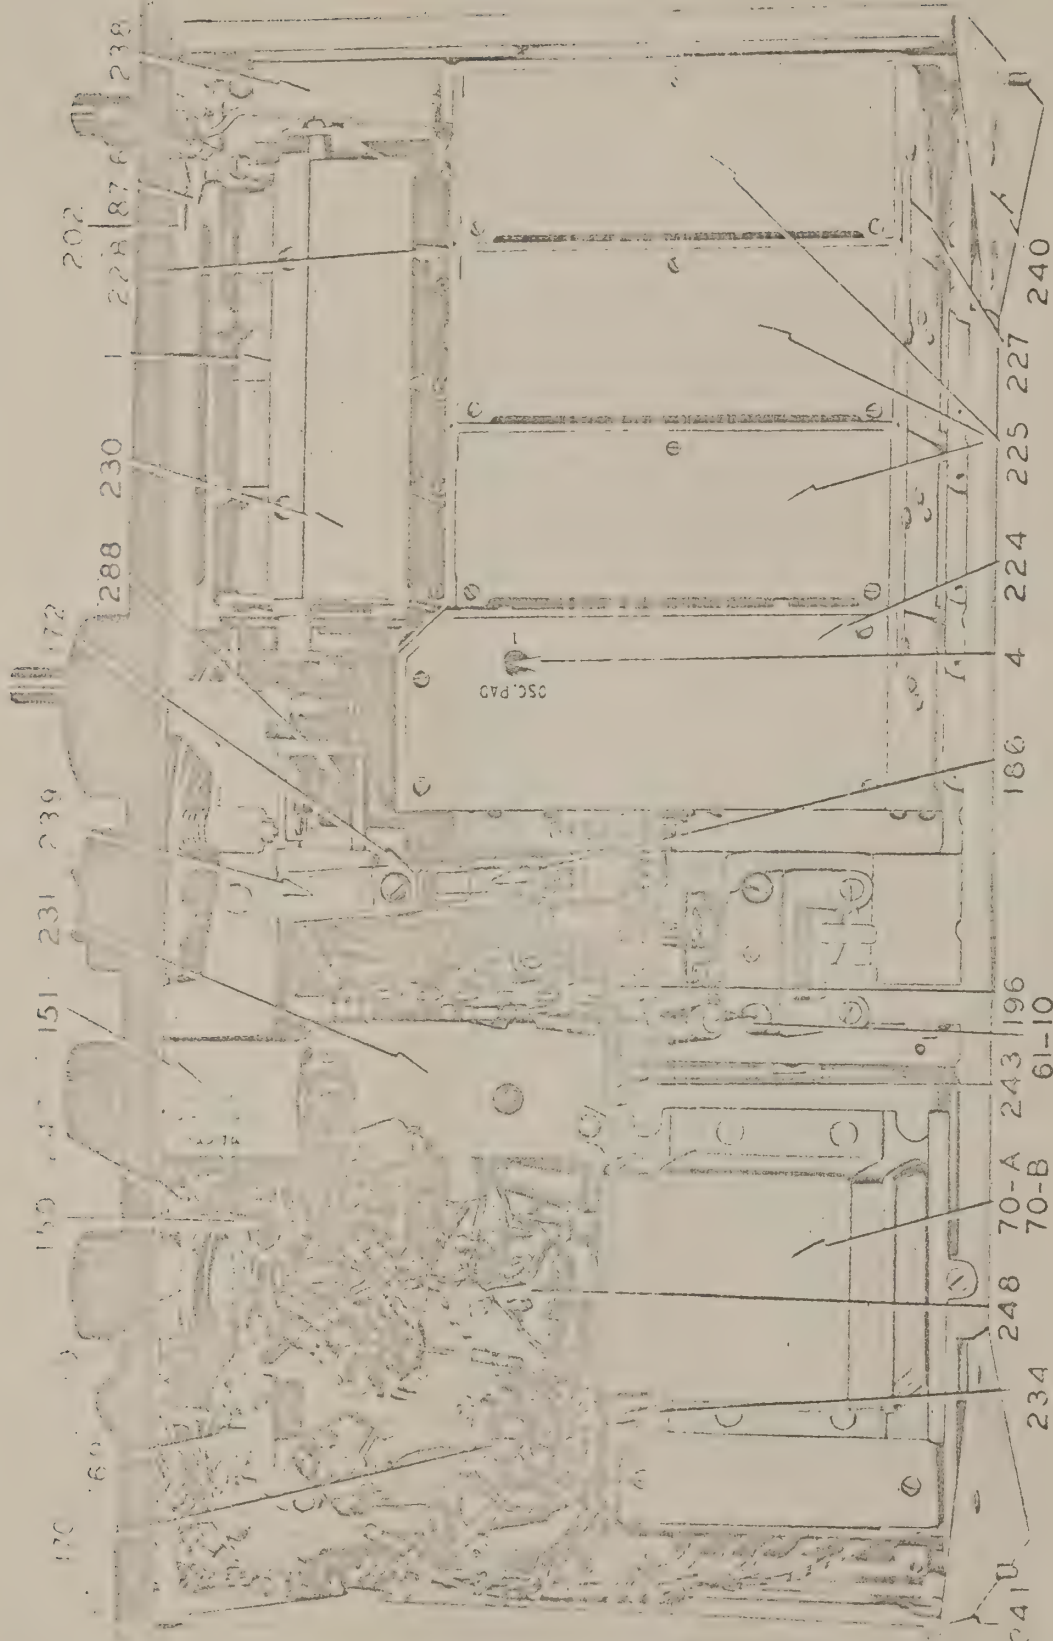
Radio Receiver BC-348-Q, Bottom View of Chassis
